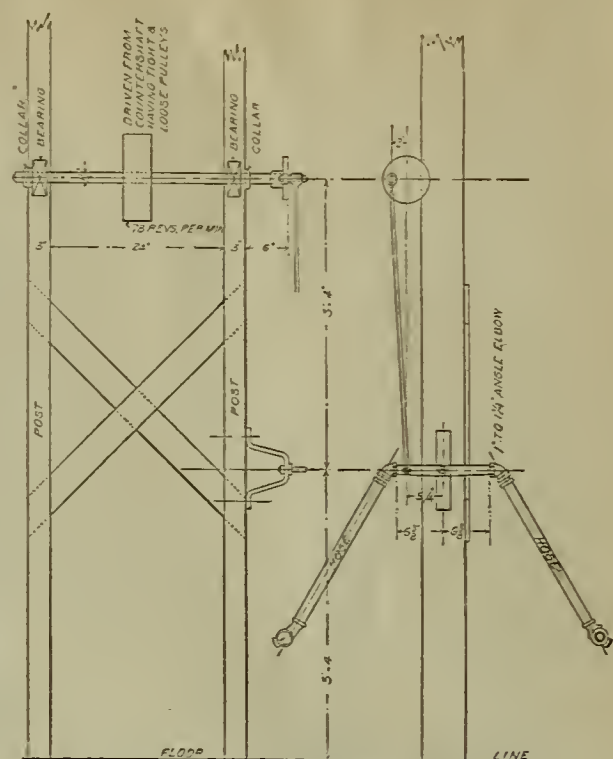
MACHINE FOR TESTING RUBBER HOSE BY KINKING.
